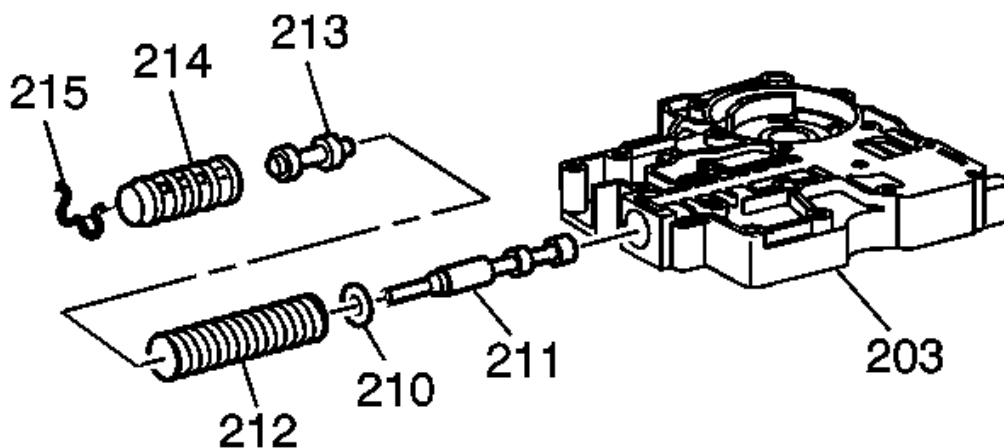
Identifying Pressure Regulator Boost Valve & Pressure Regulator Valve
